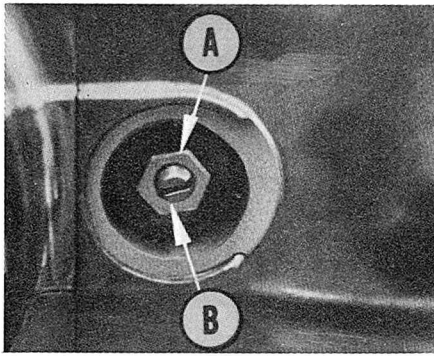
Back screw (B) out  $\frac{1}{2}$  turn after it seats lightly and tighten lock nut (A). Adjust clutch control cable for proper free play.
